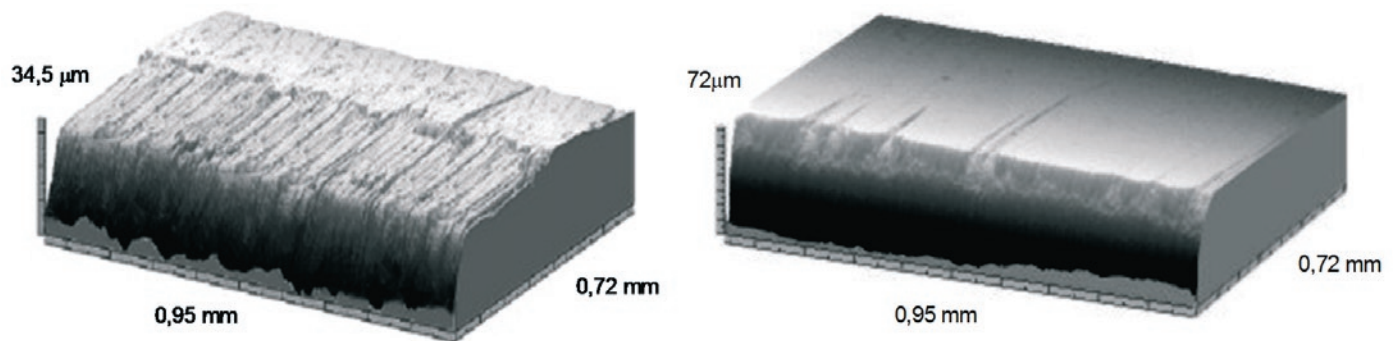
M3:2+TiN punch flank surface after 800 000 cuts with blanking clearance: a) 0%, b) 8%
